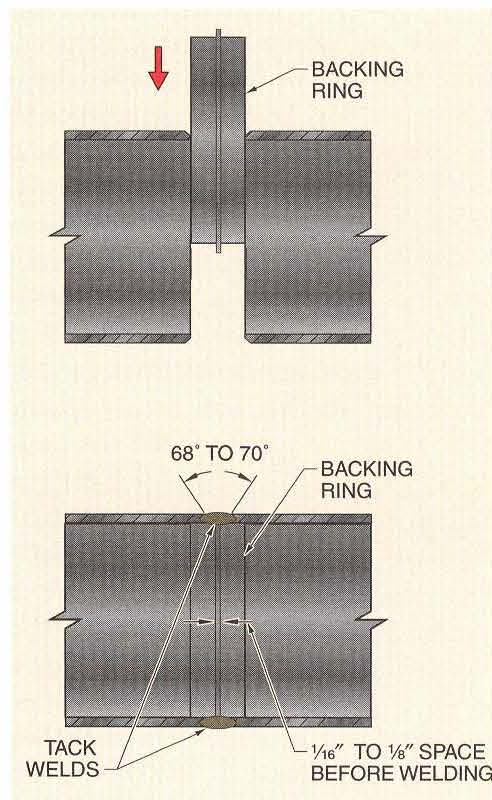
Backing rings are fitted inside the pipe before welding and keep the sections of pipe aligned, preventing slag and spatter penetration.
